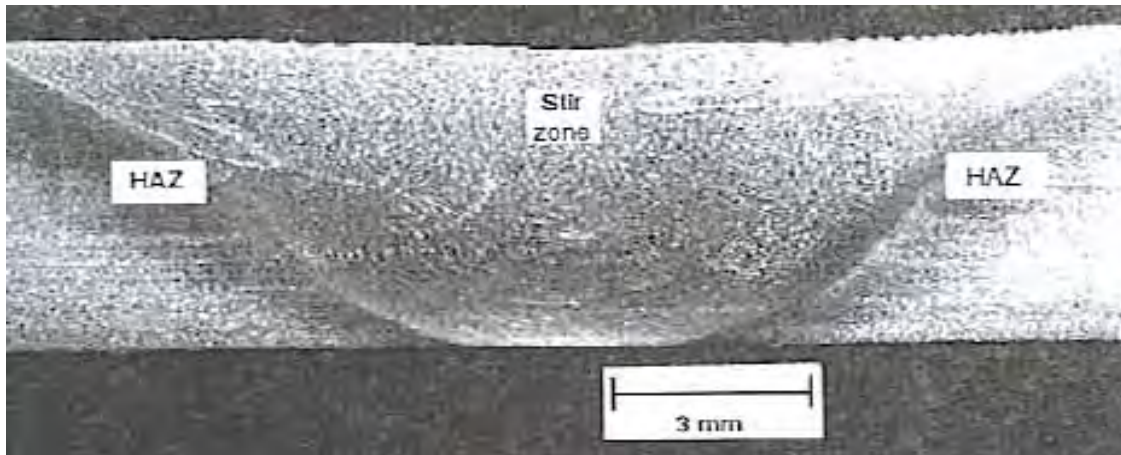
Weld Regions in Friction Stir Welded Ti-6Al-4V – courtesy of Paul Edwards, Boeing Co.
